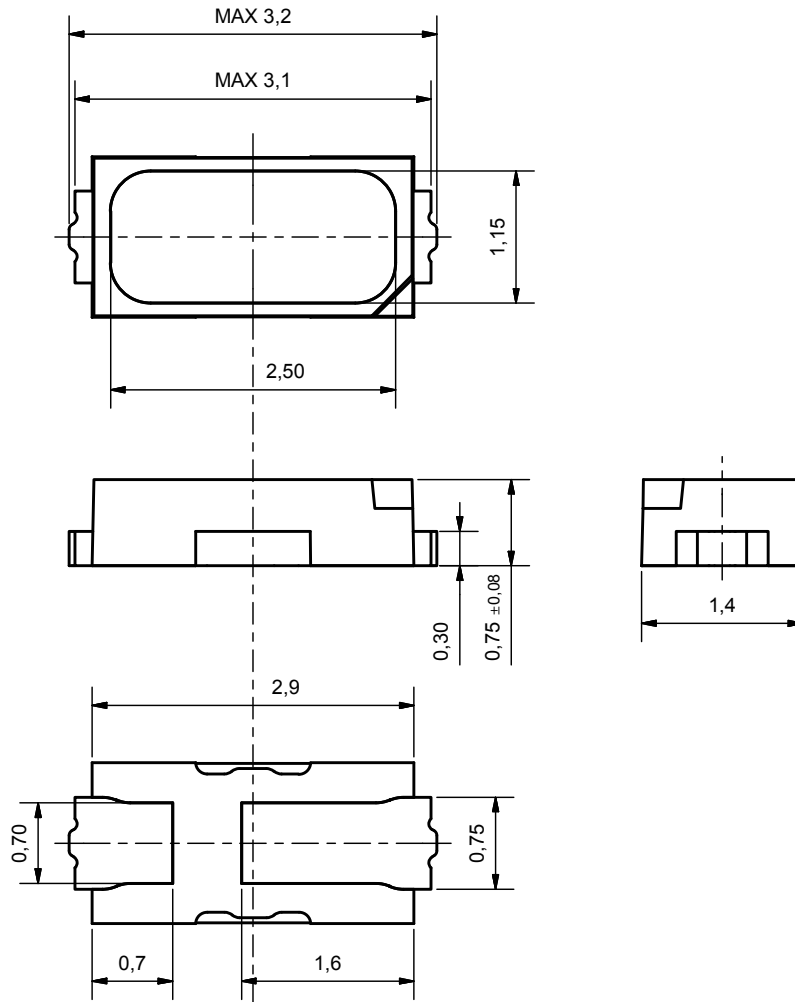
Mechanical dimensions for LUXEON 3014 with FreshFocus Technology.
